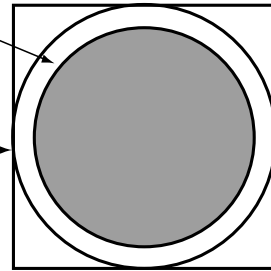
Footprint - 5 mils stencil - solder mask defined
